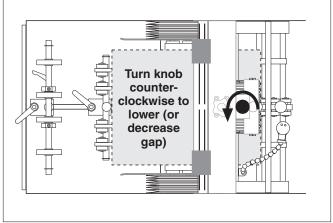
Adjusting Gate Assembly for Correct Gap
